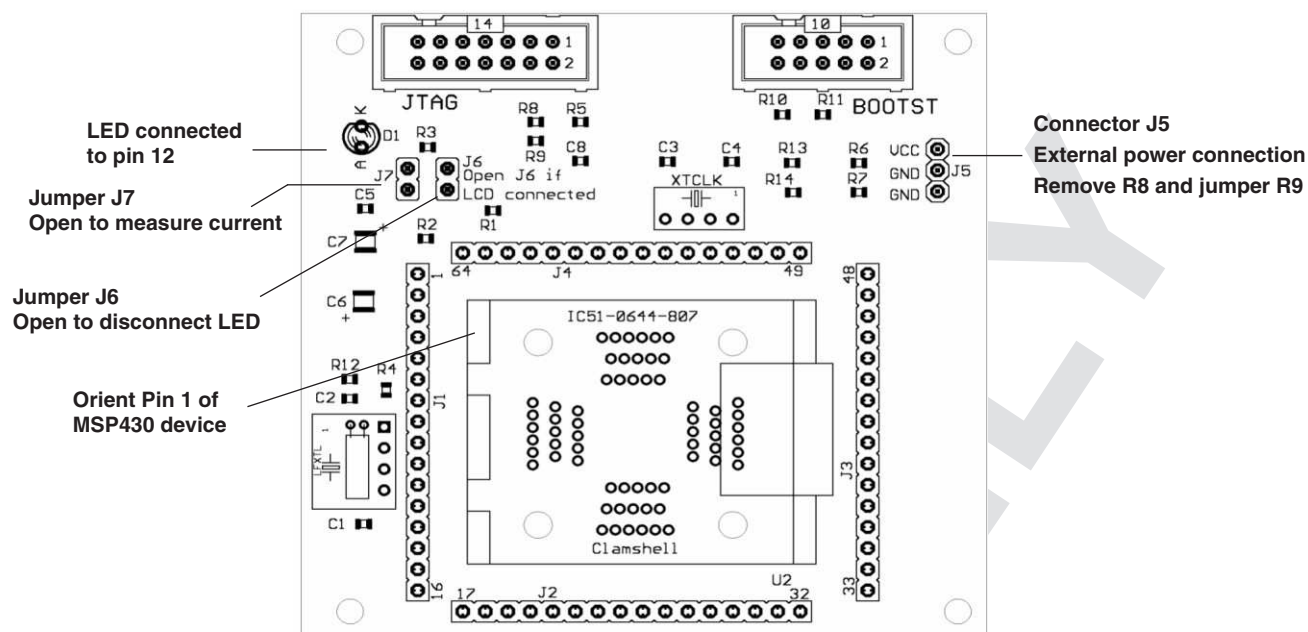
MSP-TS430PM64 Target Socket Module, PCB
